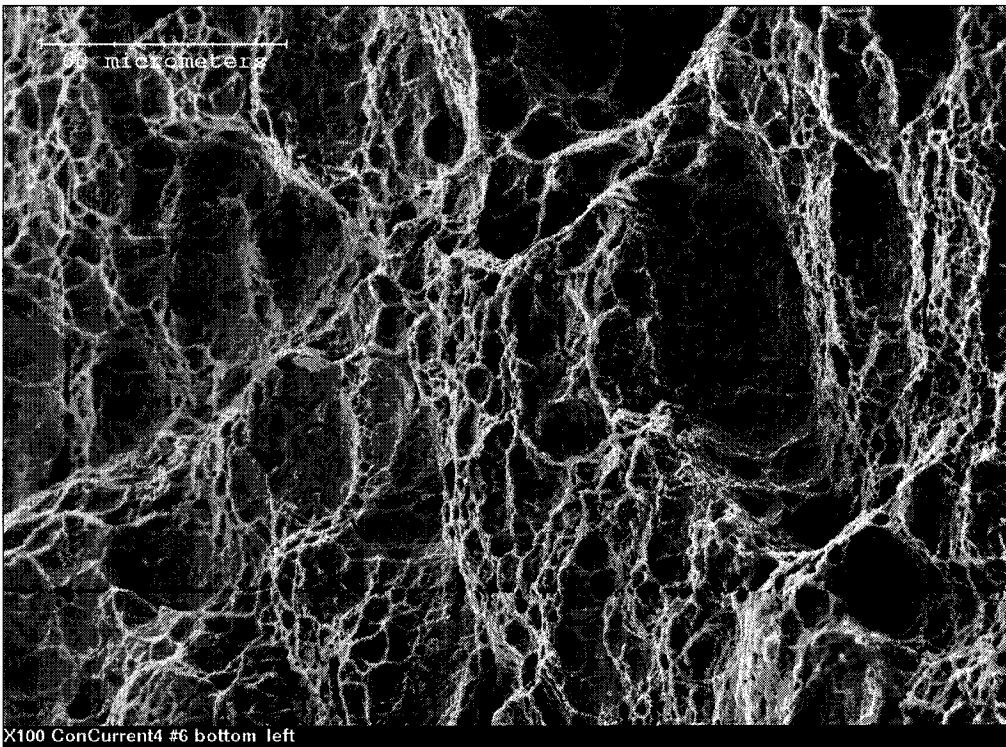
Fracture surface of X100 concurrent sample #6 (high mag)
